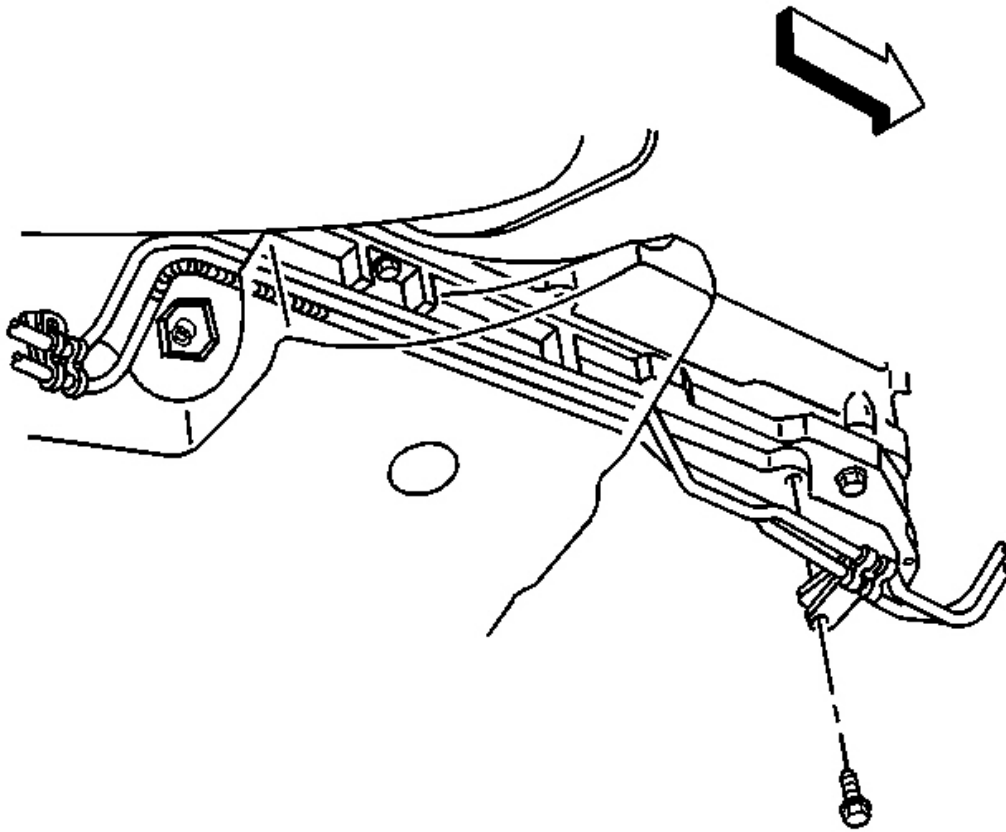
Automatic Transmission Fluid Cooler Line & Oil Pan
